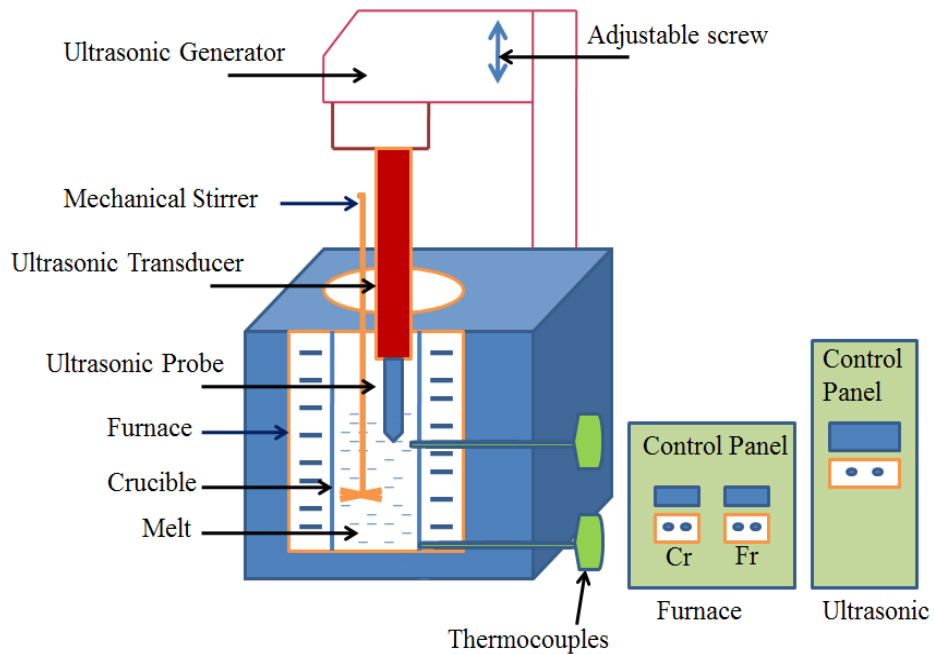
Schematic diagram of ultrasonic assisted stir casting machine
